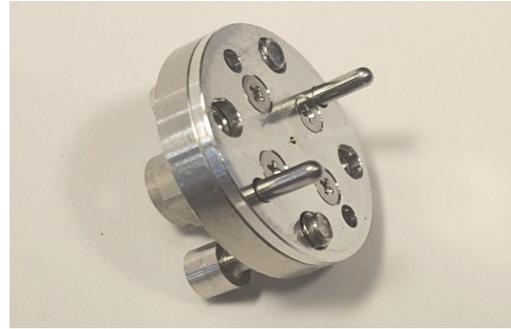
Anritsu's 33WG50 0.6-mm flange-to-1 mm (W1) coax two-piece adapter. Image shows 0.6-mm flange side.
